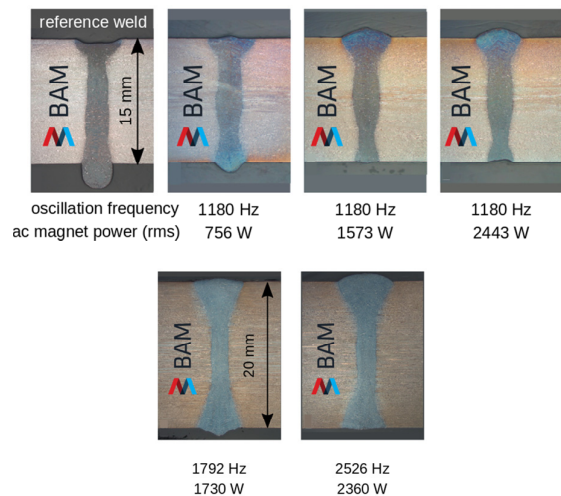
Full penetration welding of up to 20 mm thick duplex stainless steel AISI 2205, taken from Bachmann et al. (2016b). Welding speed was 0.5 m/min with 8.5 kW and 13.9 kW laser power, respectively.
